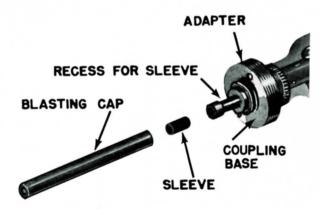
Exploded view showing coupling base, sleeve, and blasting cap.
